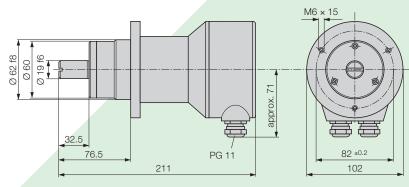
KINAX WT 707 with additional gear, screw terminals and cable glands.
